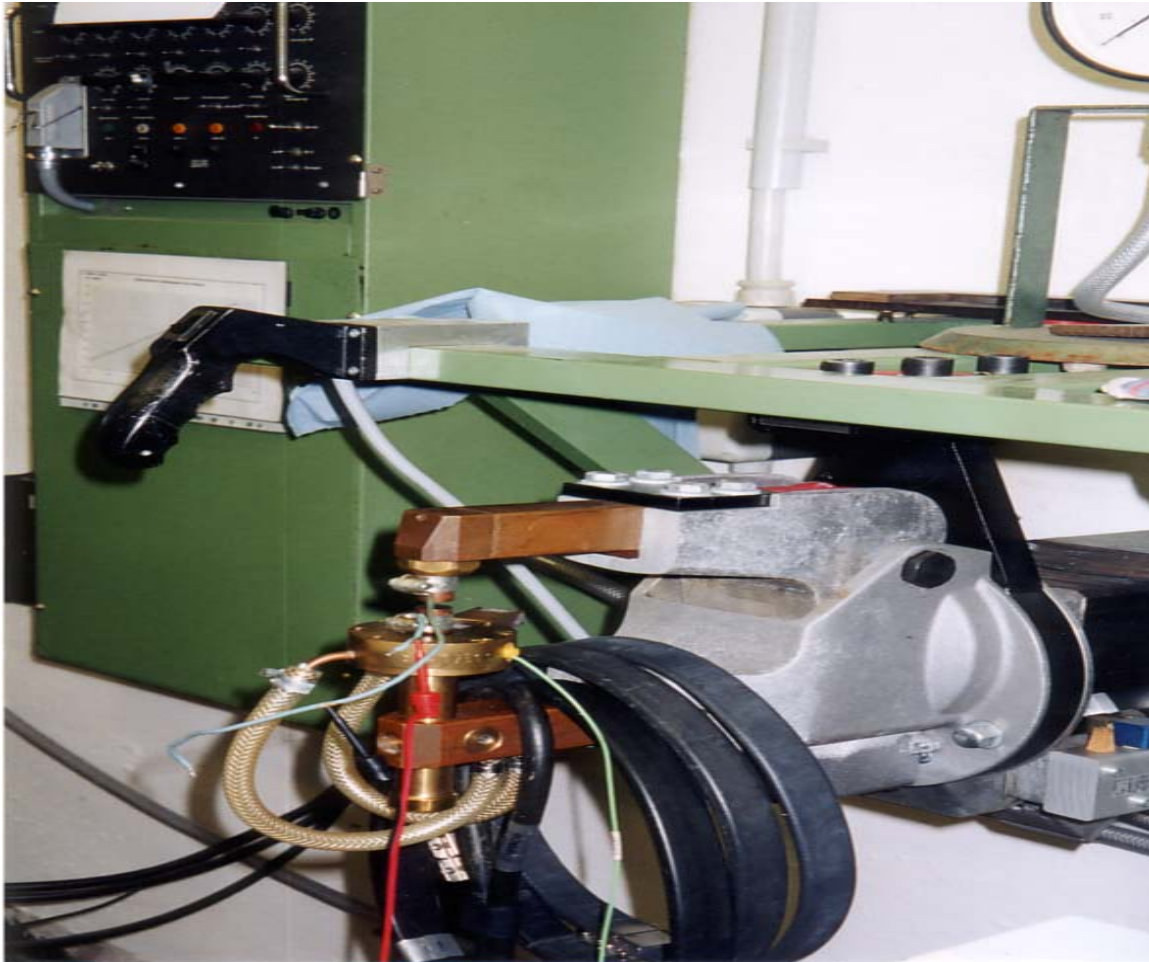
Dalex-25, Mobile Resistance spot welding machine
